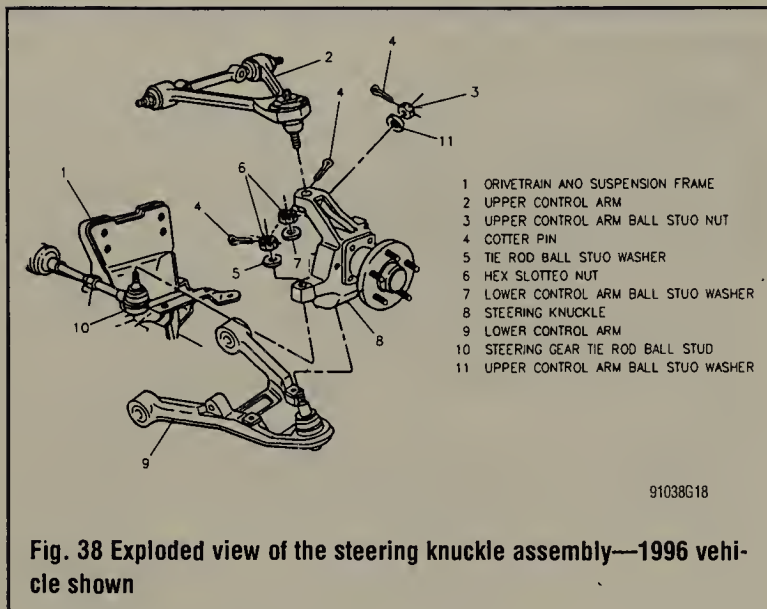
Exploded view of the steering knuckle assembly—1996 vehicle shown
